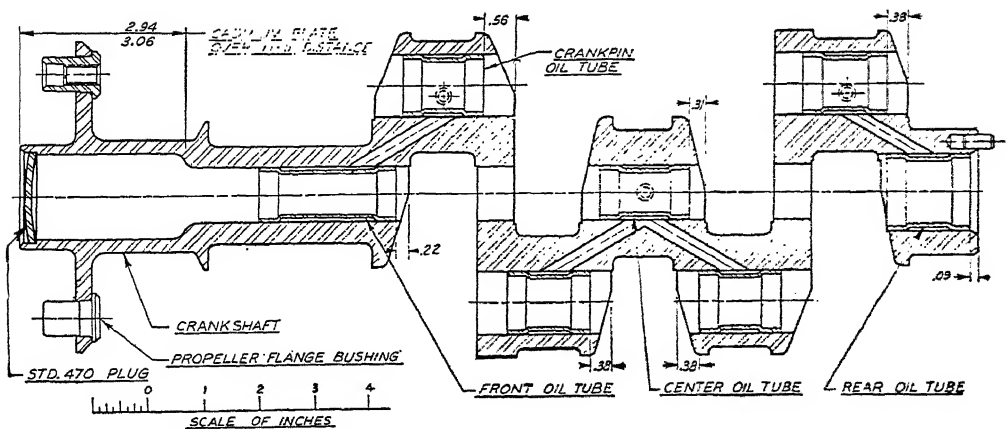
Crankshaft Assembly. Probs. 15-9 and 15-10.
